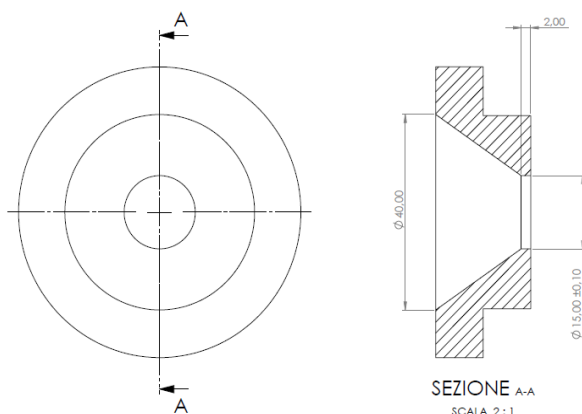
Technical drawing of the 15 mm throat diameter Nozzle (simplified version). Dimensions in millimeters.
